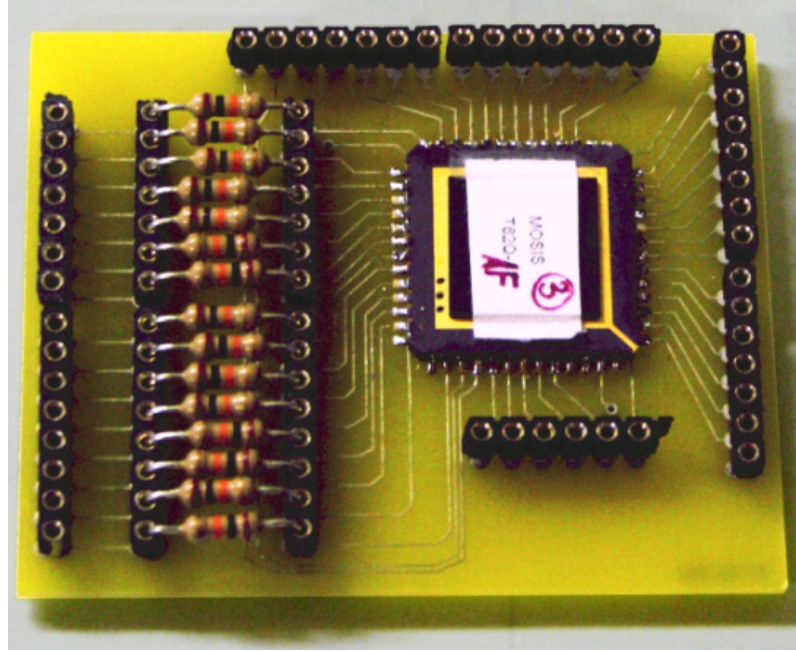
A Type-B measurement chip mounted on the experimental PCB.
